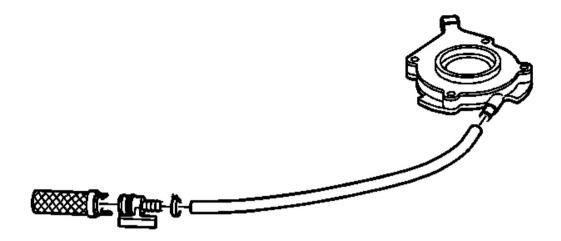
Oil Pump Hose & Oil Pump Screen Courtesy of GENERAL MOTORS CORP.
